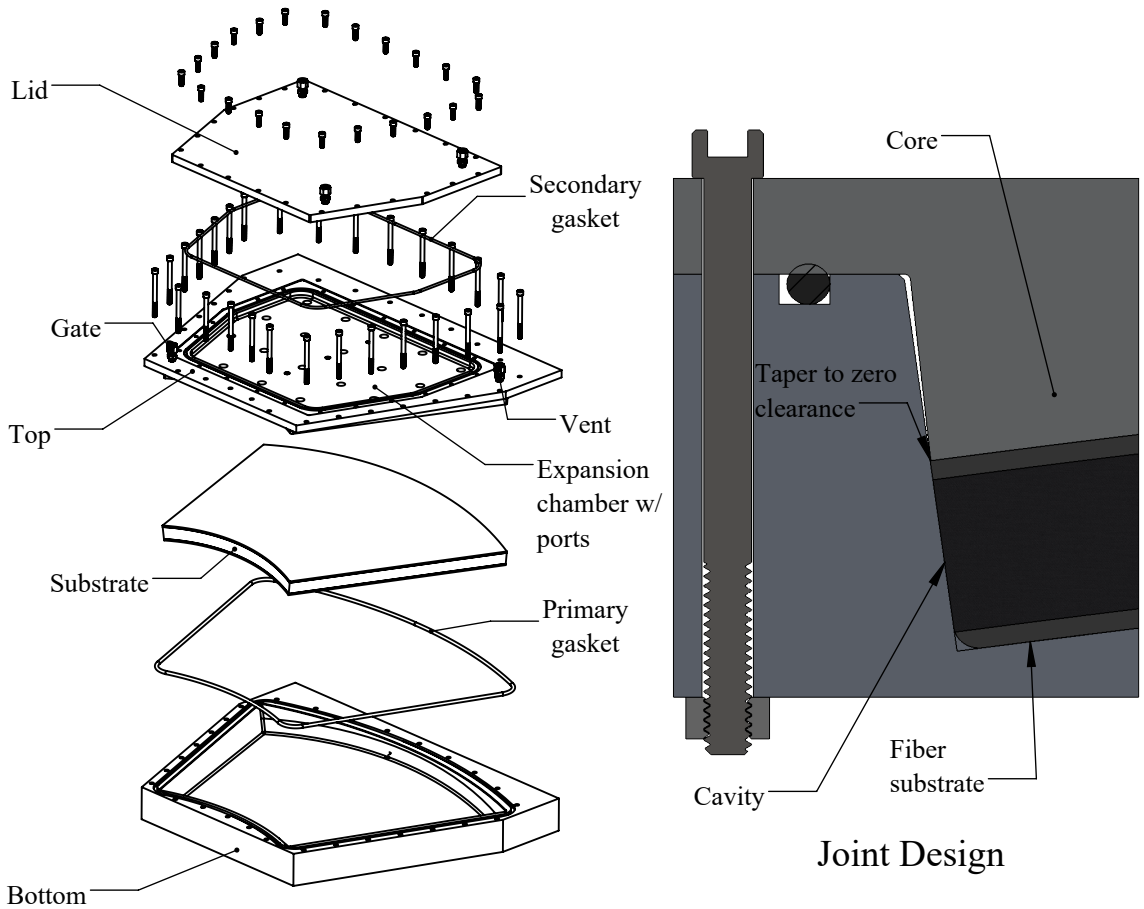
Exploded view of mold design (left) and detailed view of joint between the core and cavity sides (right)
